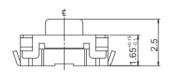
223A..., Surface Mount J Bend Terminal
